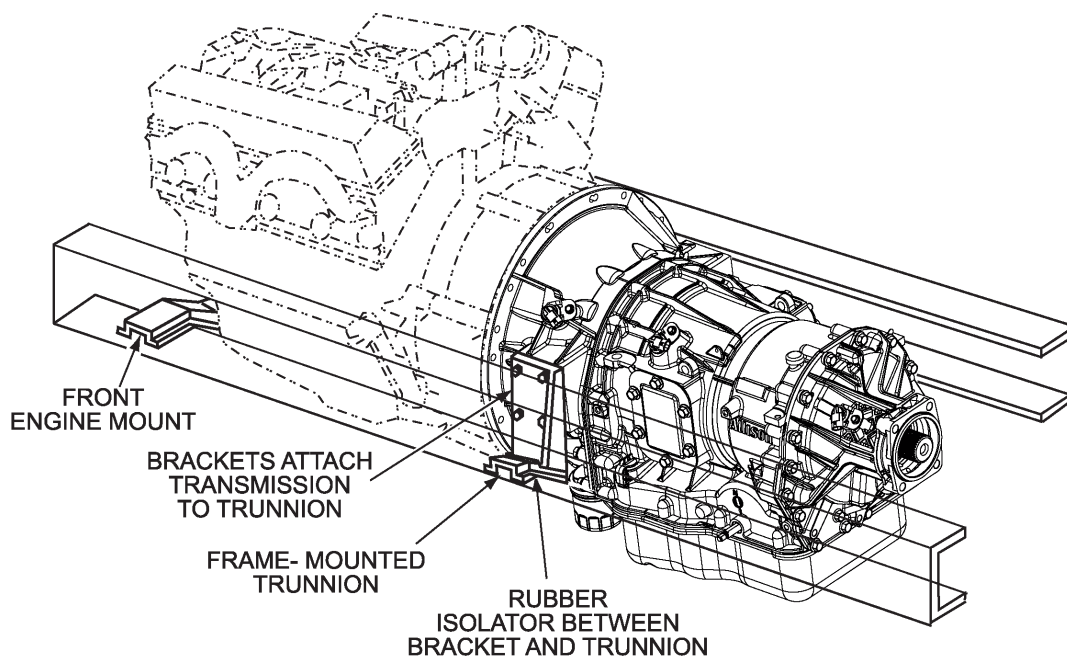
Typical Mounting Arrangement Using Transmission Side Pads – 1000/2000 Product Family Models with SAE No. 3 Converter Housing is shown
